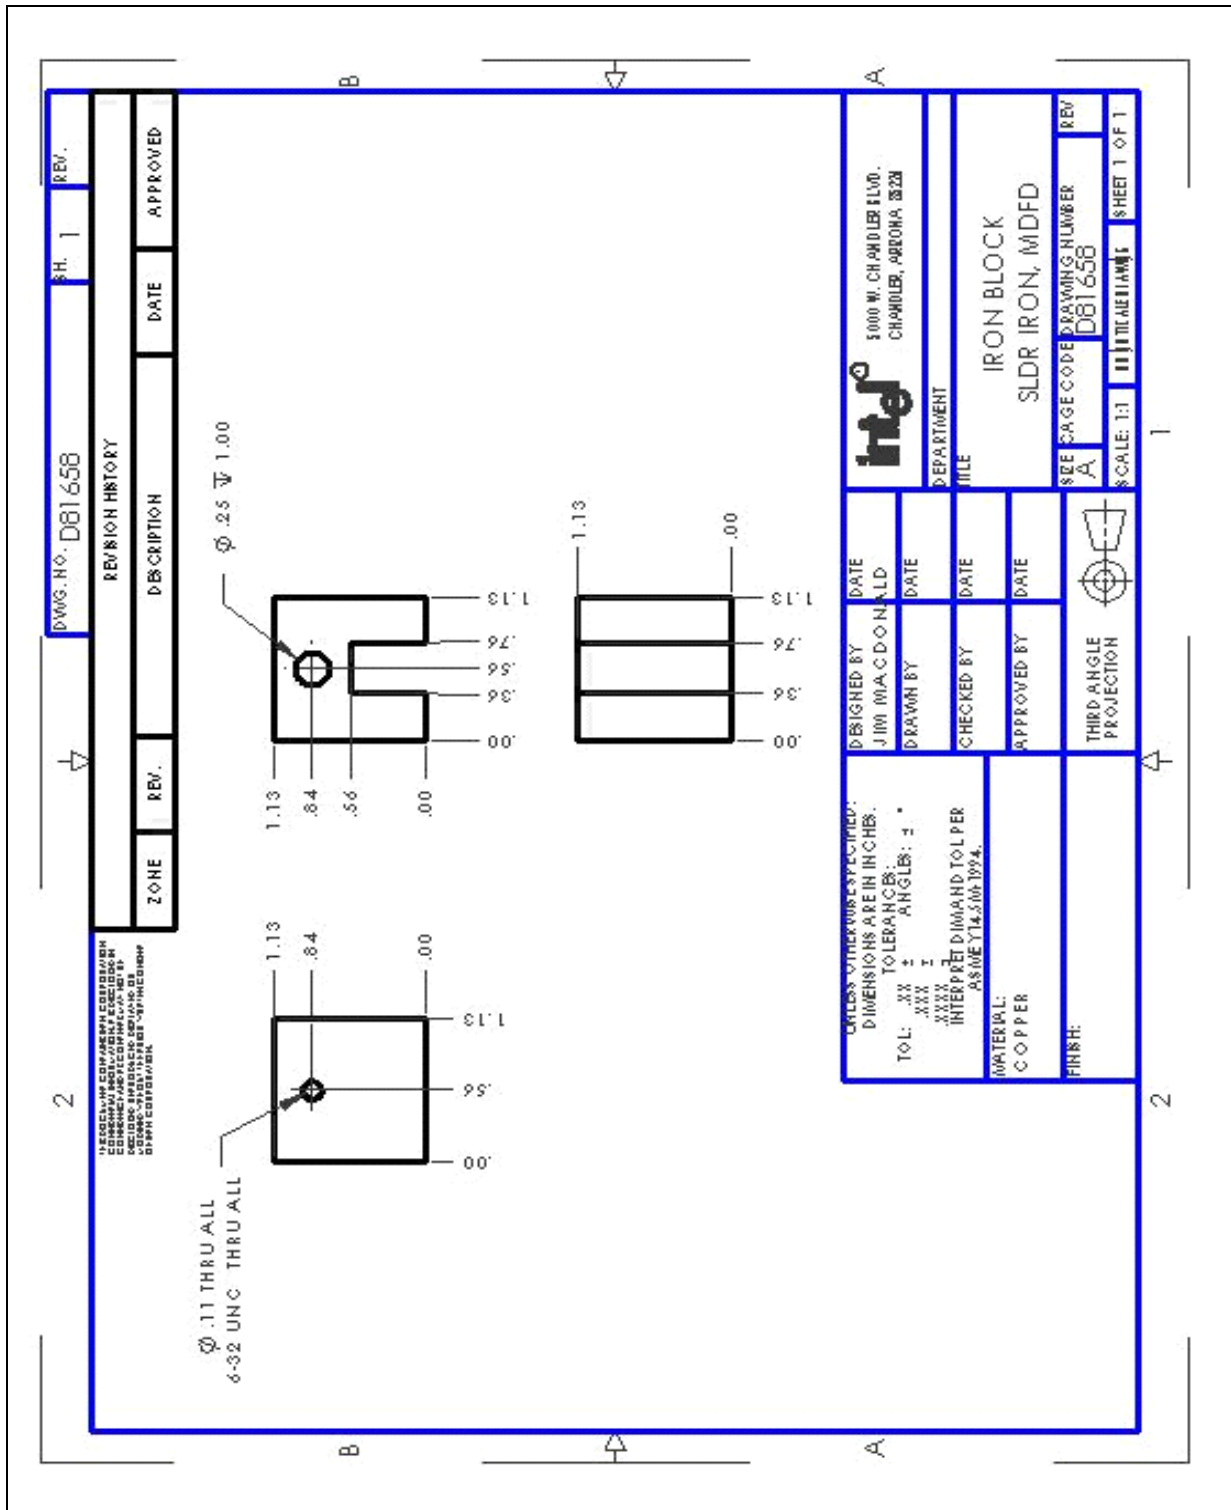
IRON Block Solder Iron Drawing (3 of 4)
